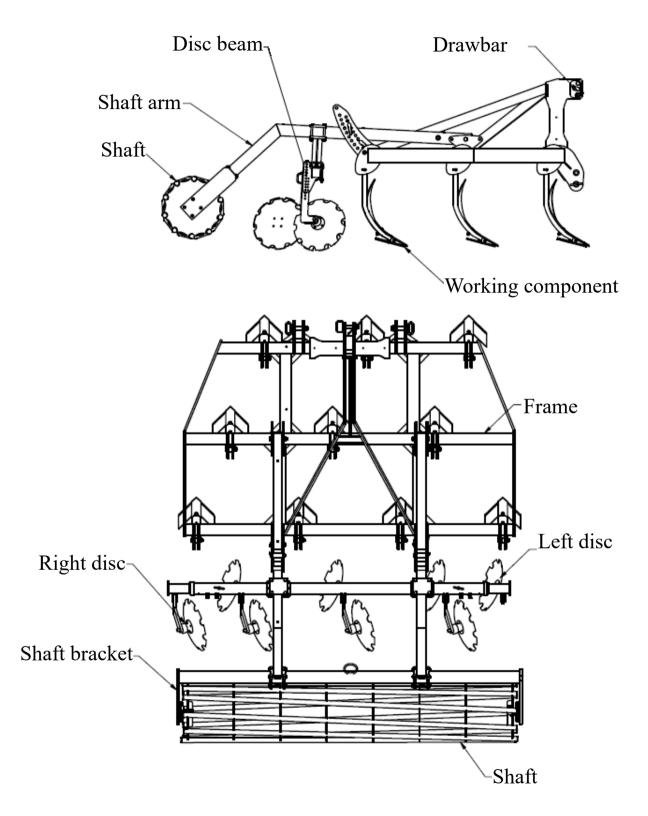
Construction of the TOP unit: 1- Frame, 2- right side frame, 3- left side frame, 4- disc beam, 5- shaft, 6- shaft arm,7- drawbar, 8- working component, 9- shaft bracket, 10- right disc, 11- left disc, 12- cylinder, 13- hydraulics mechanical lock, 14- bumper.
